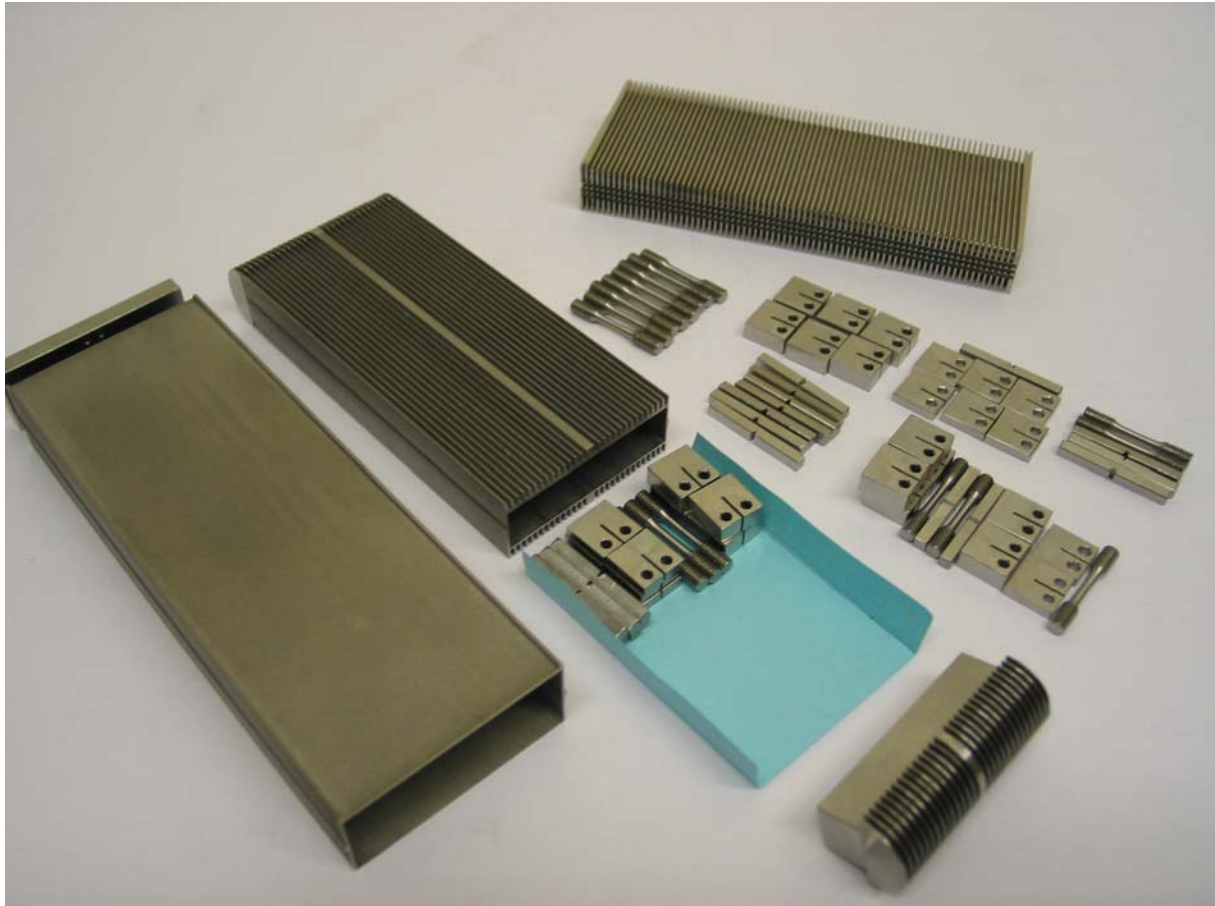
Rig (left), capsule (former design), set of specimen for handling, carved work piece (right) with grooves (new design).
